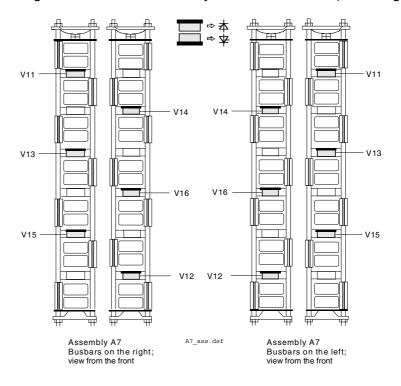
Location of thyristors in frame A7 (2-Q bridge)
